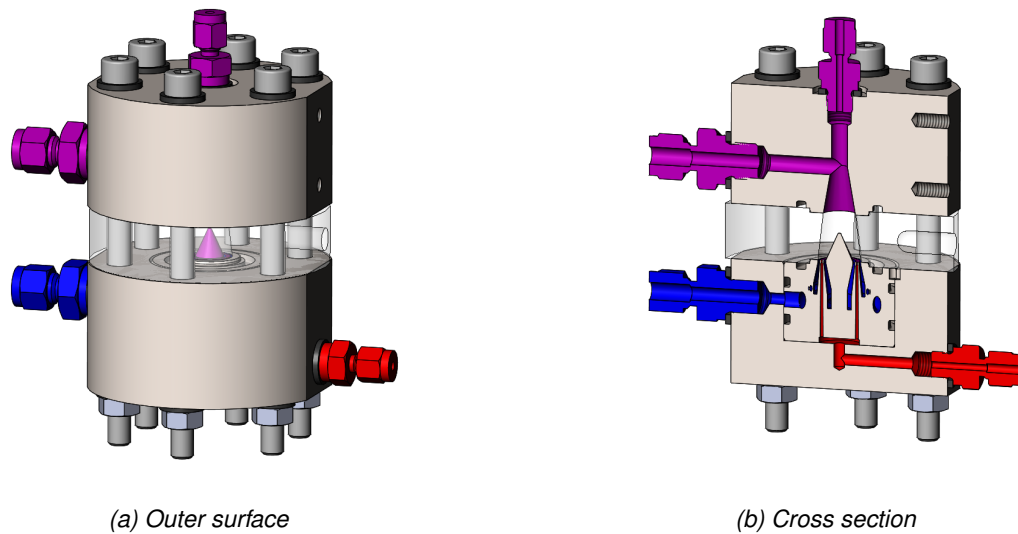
Pre-mix chamber consisting of four machined parts: the additively manufactured injector block and injector housing, the chamber outlet and the chamber spacer (acrylic). The flow paths are colour coded dependent on the fluid: fuel (red), oxidiser (blue), NOFB (purple). There are two outlets, one to the engine (horizontal), and one to a choke which was sized to maintain steady state backpressure during filling (vertical).
